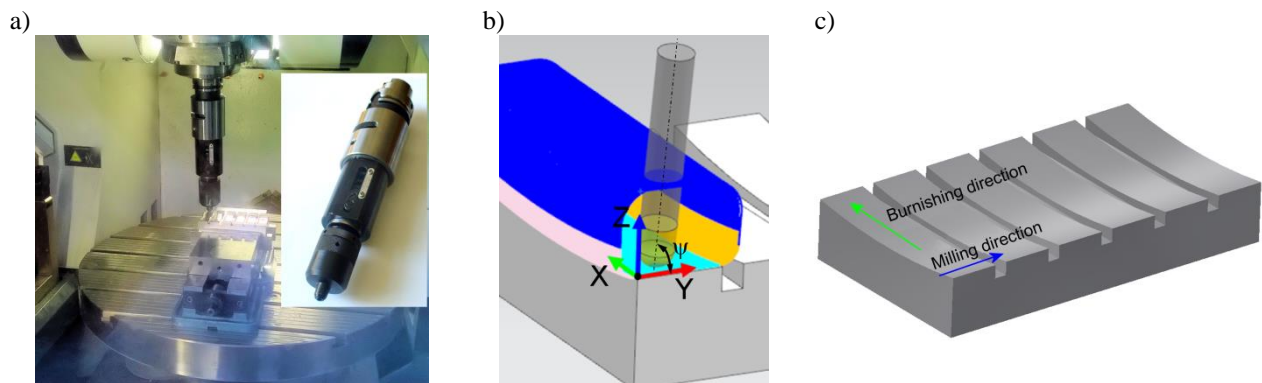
The view of the working space of machining center and burnishing tool (a), visualization of ball-end milling in the direction perpendicular to the Y axis (b), the specimen with marked directions of working movements (c) [7]
